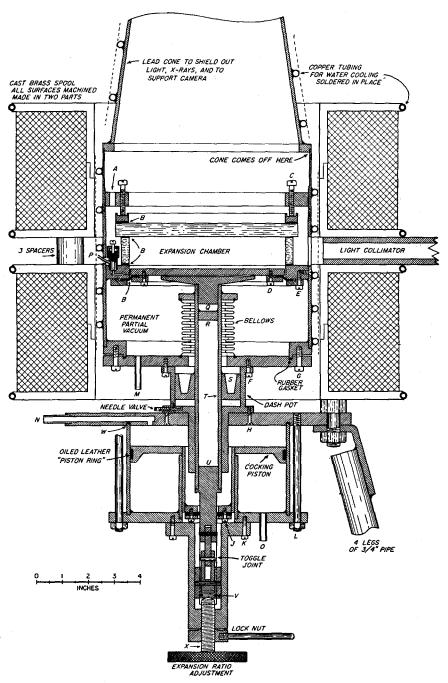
Cross section of the assembled cloud chamber, with the piston shown in the cocked position.
